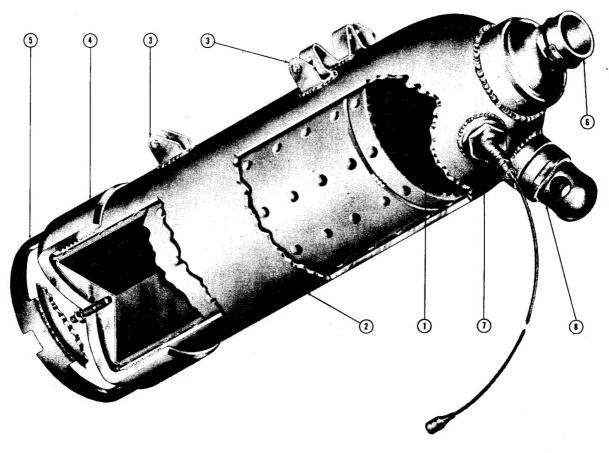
JATO construction. 1, propellant cartridge. 2, chamber assembly. 3, attachment fittings. 4, forward closure cap. 5, ring-stand. 6, nozzle assembly. 7, igniter assembly. 8, safety pressure release assembly.
